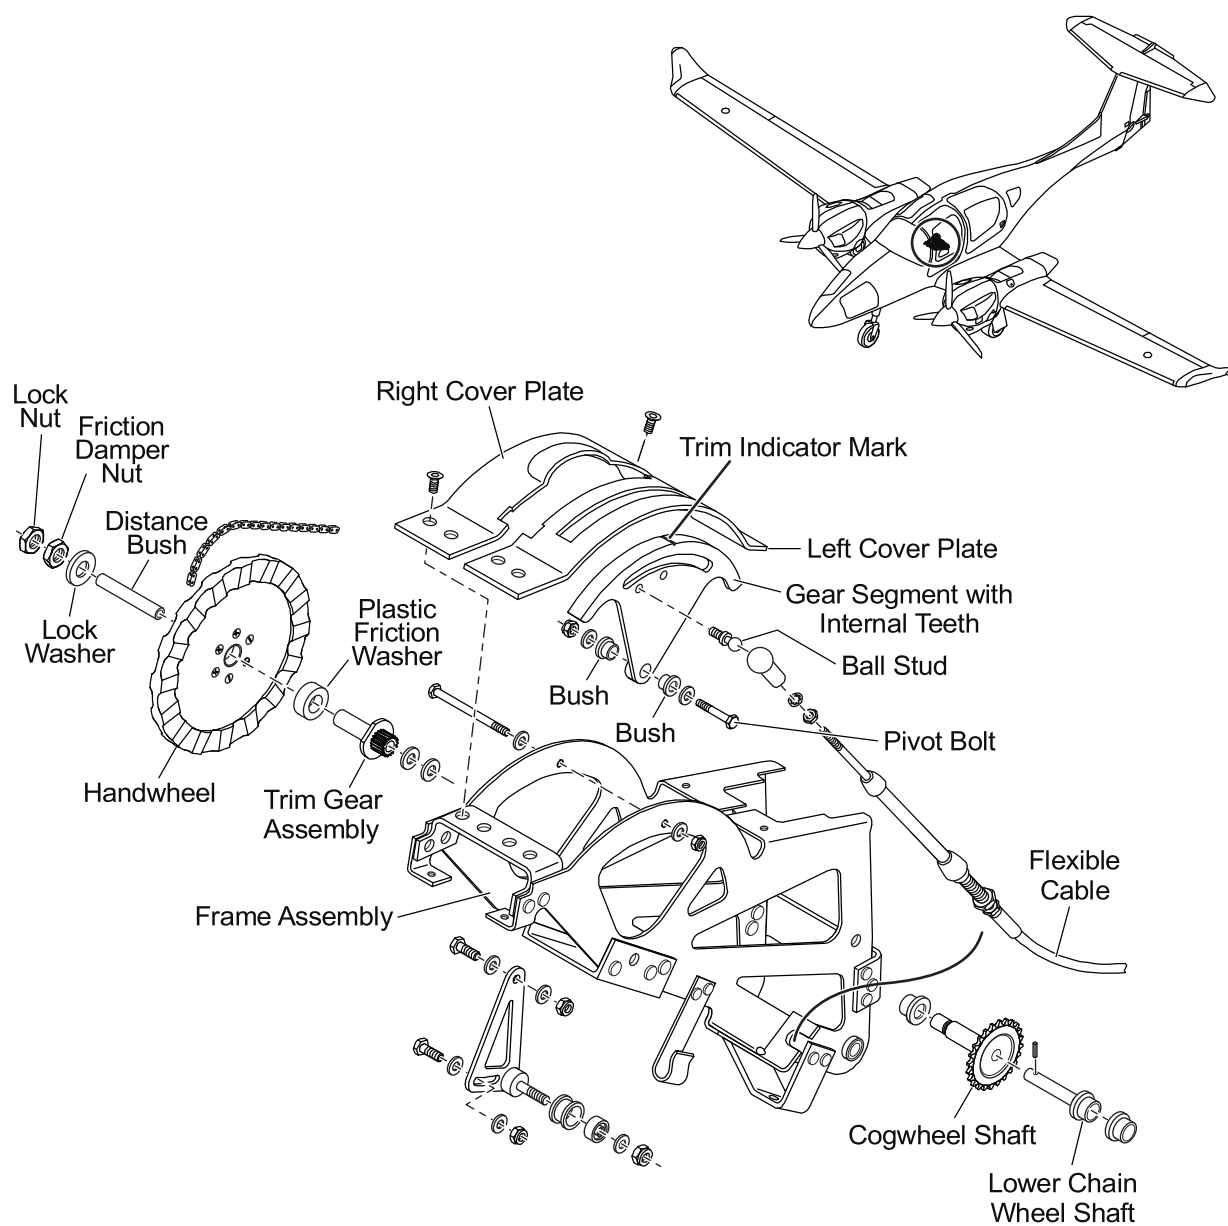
Elevator Mechanical Trim-Mechanism in the Cockpit
